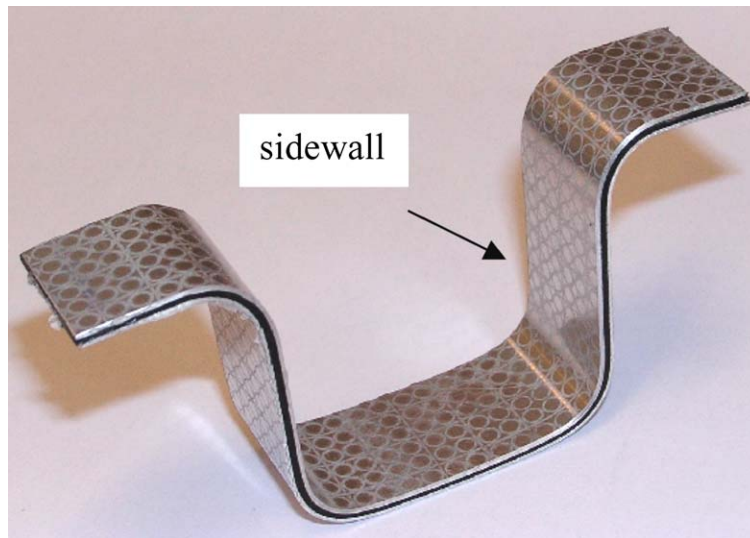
Aluminum-Curv channel section formed with 7 mm tool radii.
